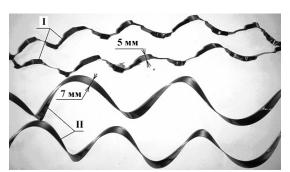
The examples of a chips which are the results of machining on a lathe model 1A616: I - базовым резцедержателем станка при режимах резания V=200 м/мин; S=0,1 мм/об; t=5 мм; II- резцедержателем с ориентированной жесткостью при режимах резания V=200 м/мин S=0,1 мм/об; t=7 мм
